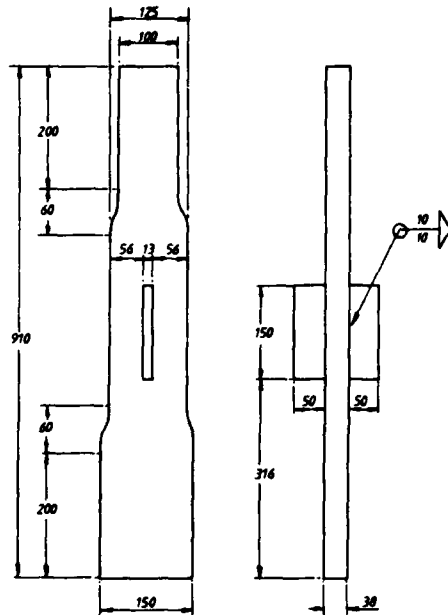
Specimen configuration; dimensions in millimeters (private communication from G.S. Booth, The Welding Institute, Abington, Cambridge, UK, 1984).
